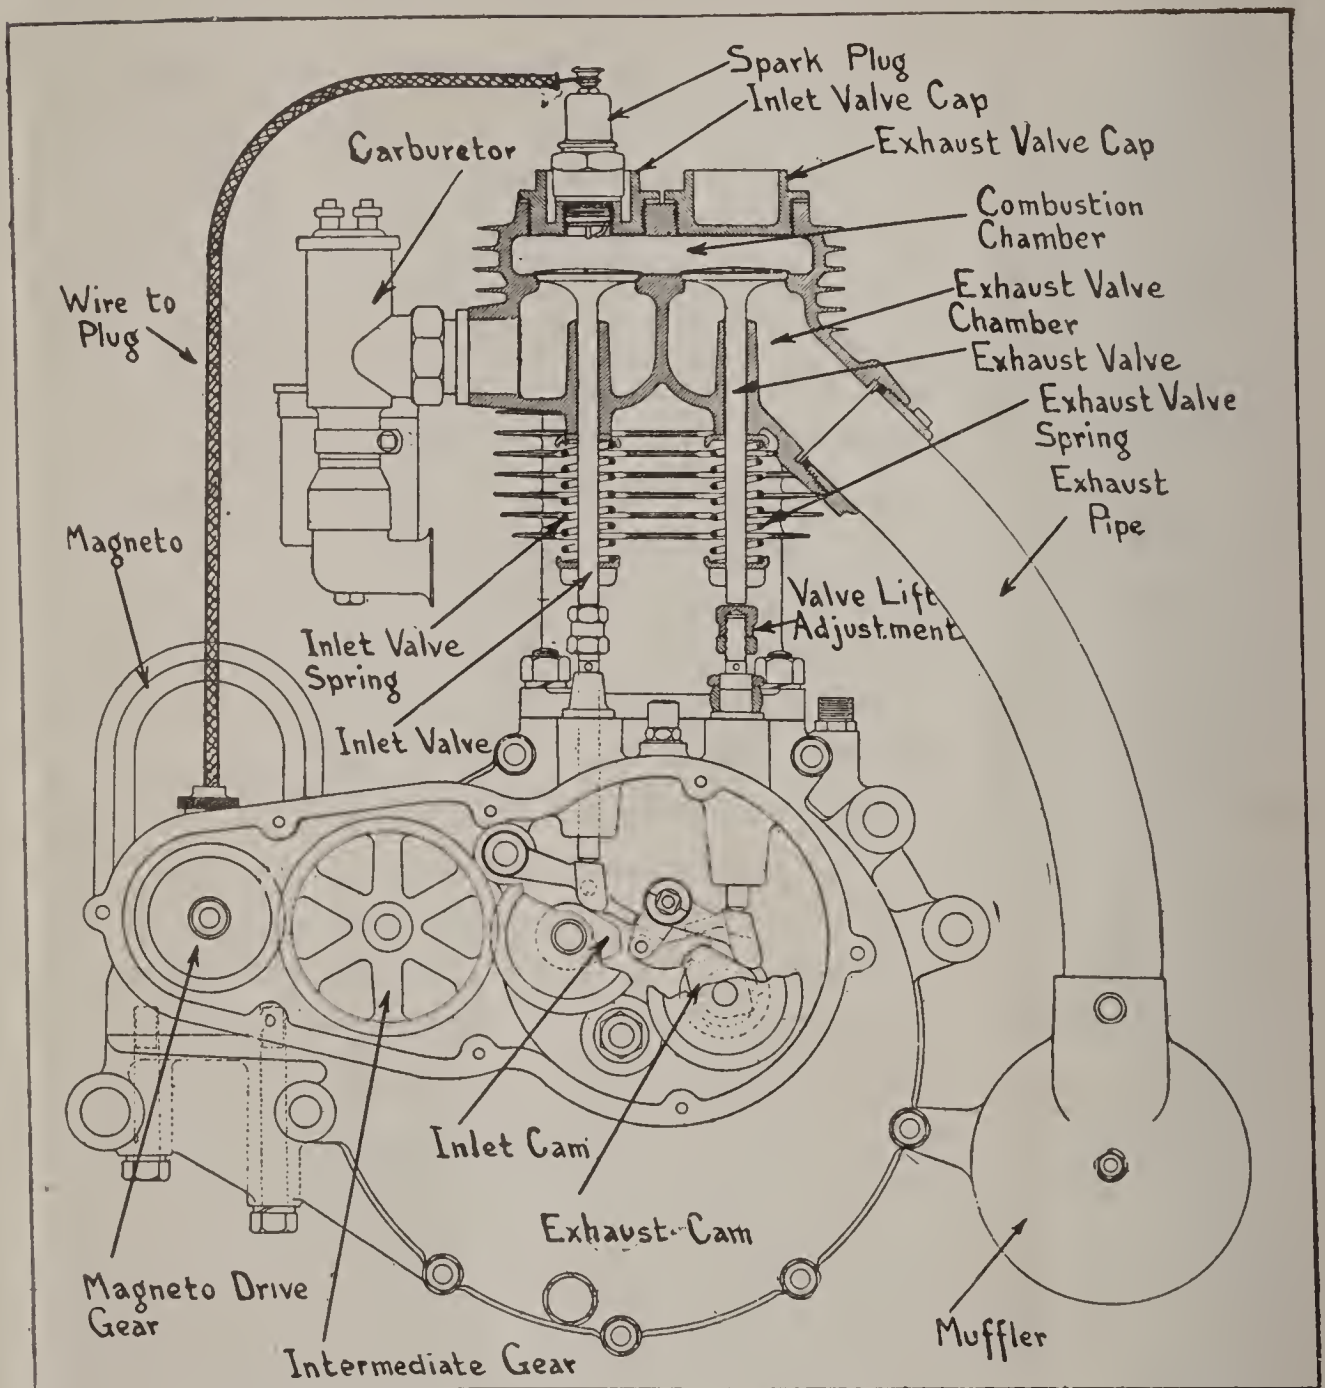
Complete Single Cylinder Motorcycle Power Plant of English Design, Showing Location of Carburetor, Magneto and Muffling Device.
